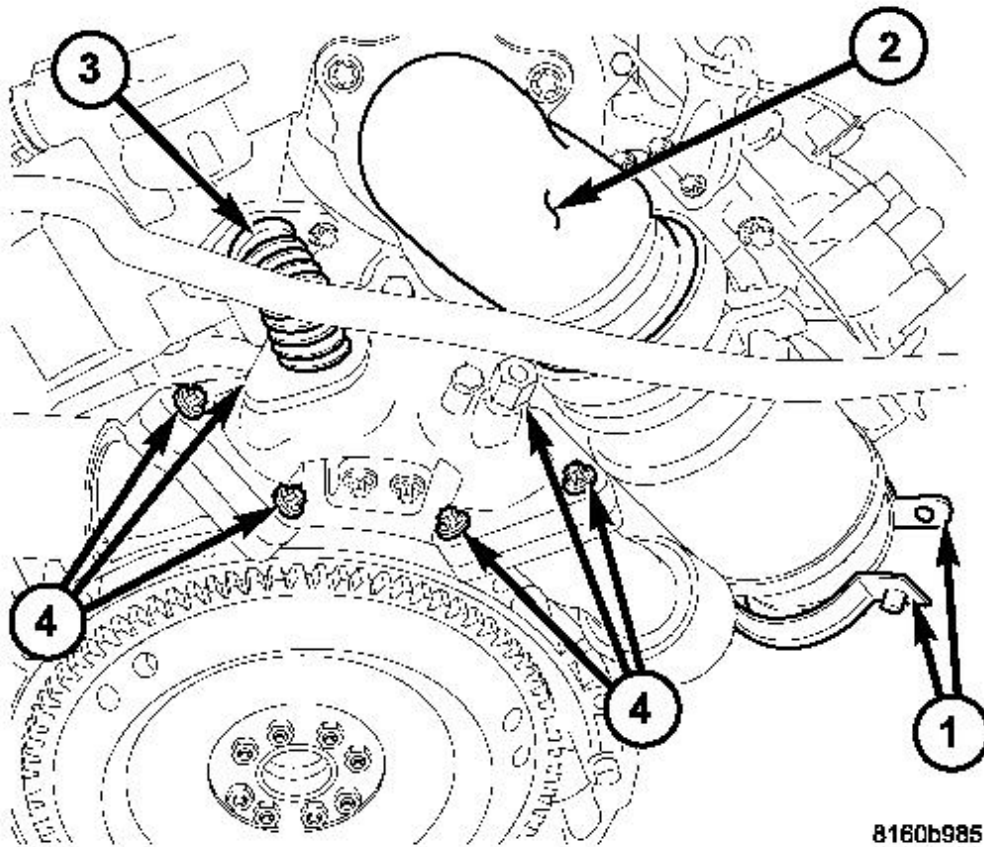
Removing/Installing Air Intake, Turbo & Exhaust System Components
